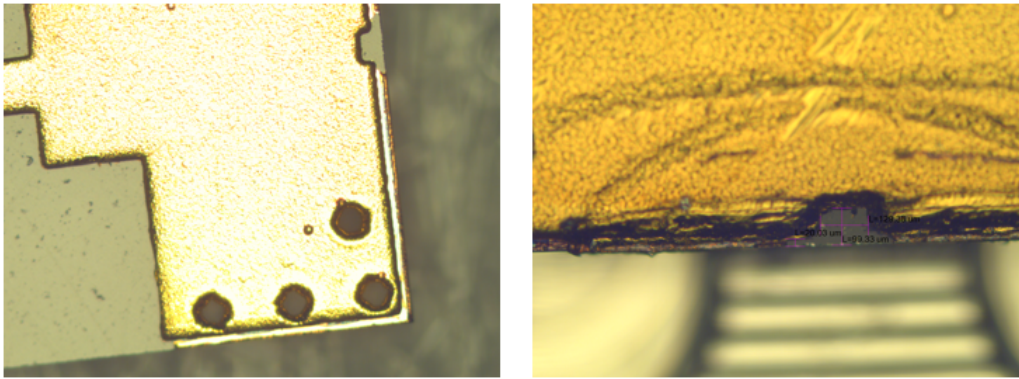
PCB manufacturing tolerances: (Right) shows the tolerances for metalized vias and the metal thickness at the edges, (Left) (zoomed) shows the manufacturing tolerances for the tuning slot
